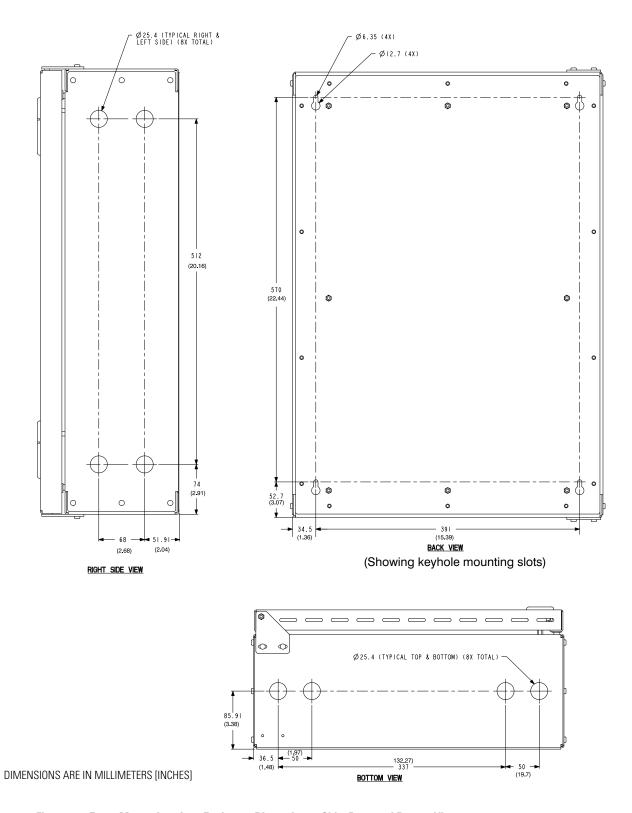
Eaton Master Interface Enclosure Dimensions - Side. Rear, and Bottom Views
